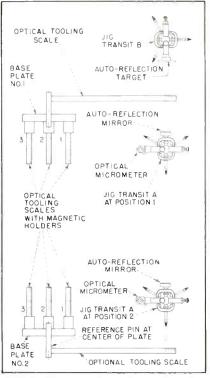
Steps in aligning base plates between which a 20-foot antenna tower section is assembled and welded
